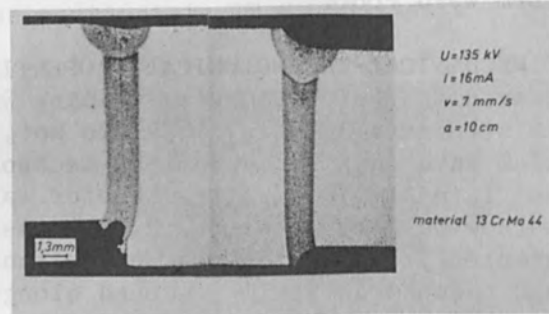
EB welding of dissimilar cross sections.
